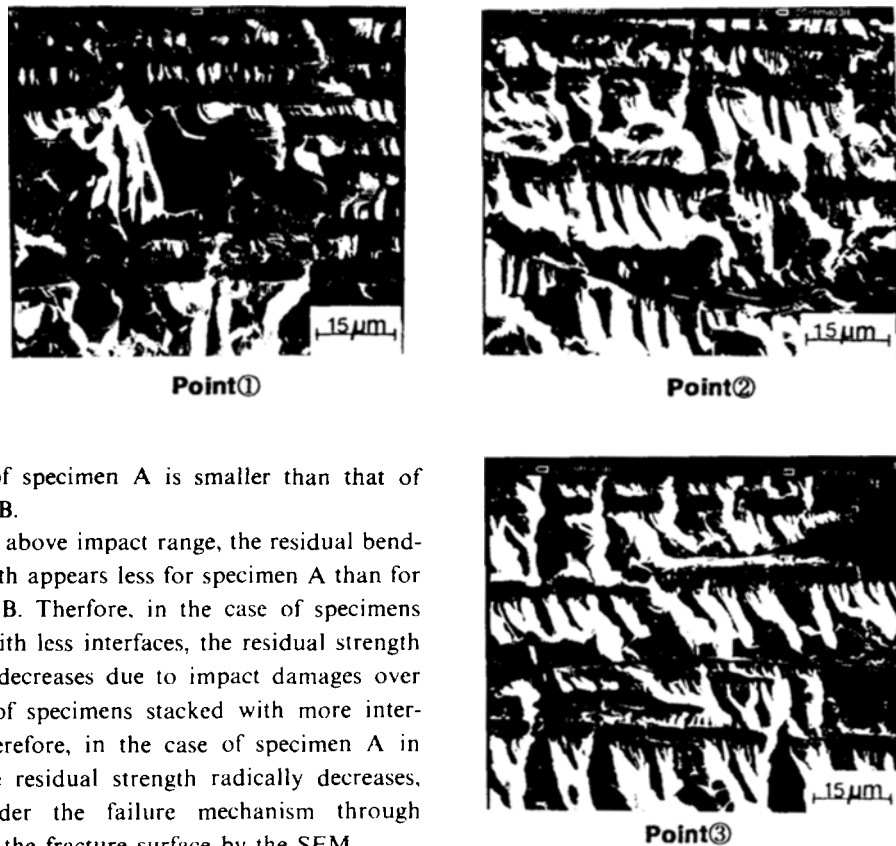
Fractography of delamination and fracture surface (Impacted-side compression) (magnification 500 \times)
